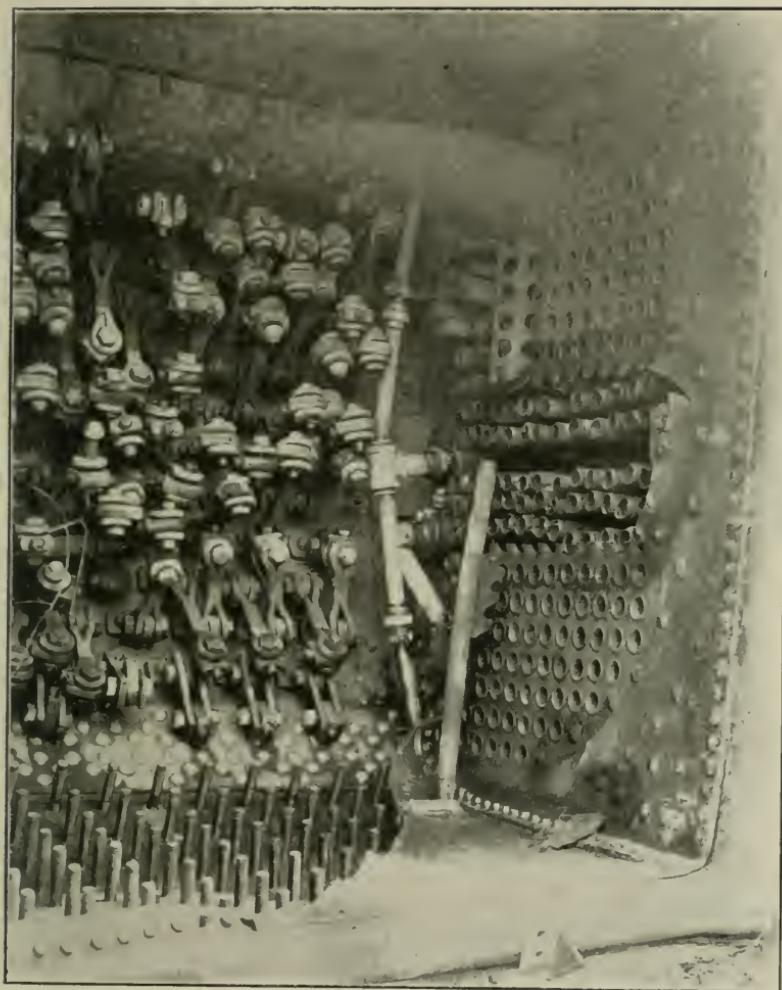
PLATE III.—Enlarged section of Plate II showing ruptured tube-sheet and end of tubes.
